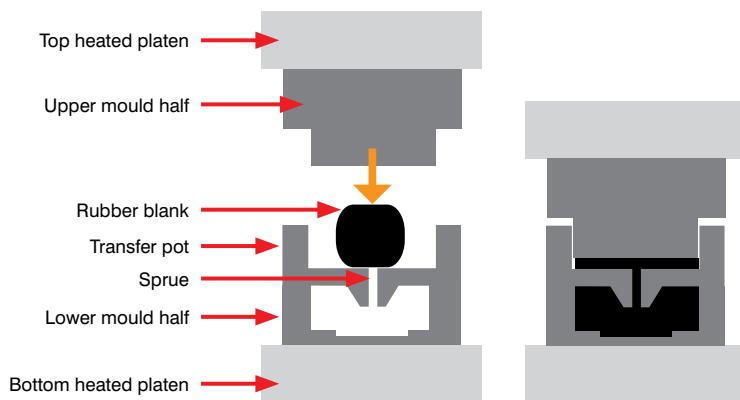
Transfer moulding process showing mould open (left) with the elastomer blank in the transfer pot, and mould shut (right) with the elastomer injected into the cavity.
